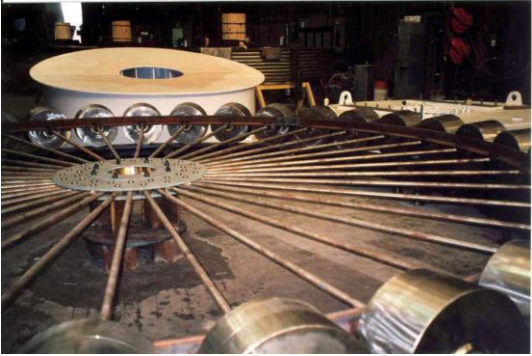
Rim support - new assembly of wheels spider rods and center plate
